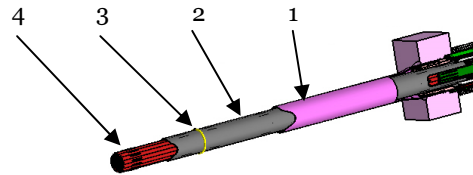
Schematic illustration of calandria tube with pressure tube and fuel bundle
